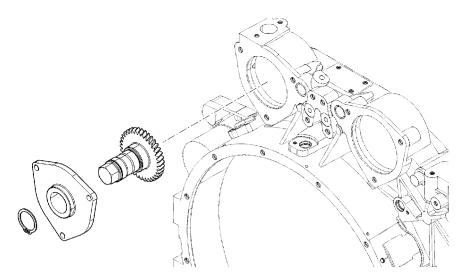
Turning device - Auxiliary output NA2 attachment special tool no. 30e
